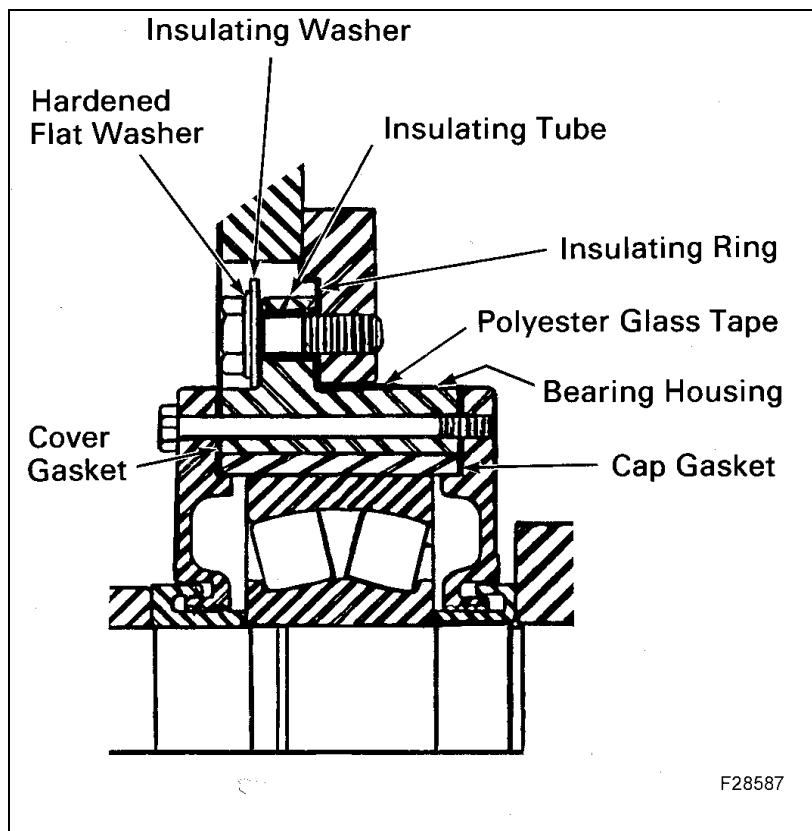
Large Bearing Insulation (NOTE: Similar to new small bearing housing kit)
